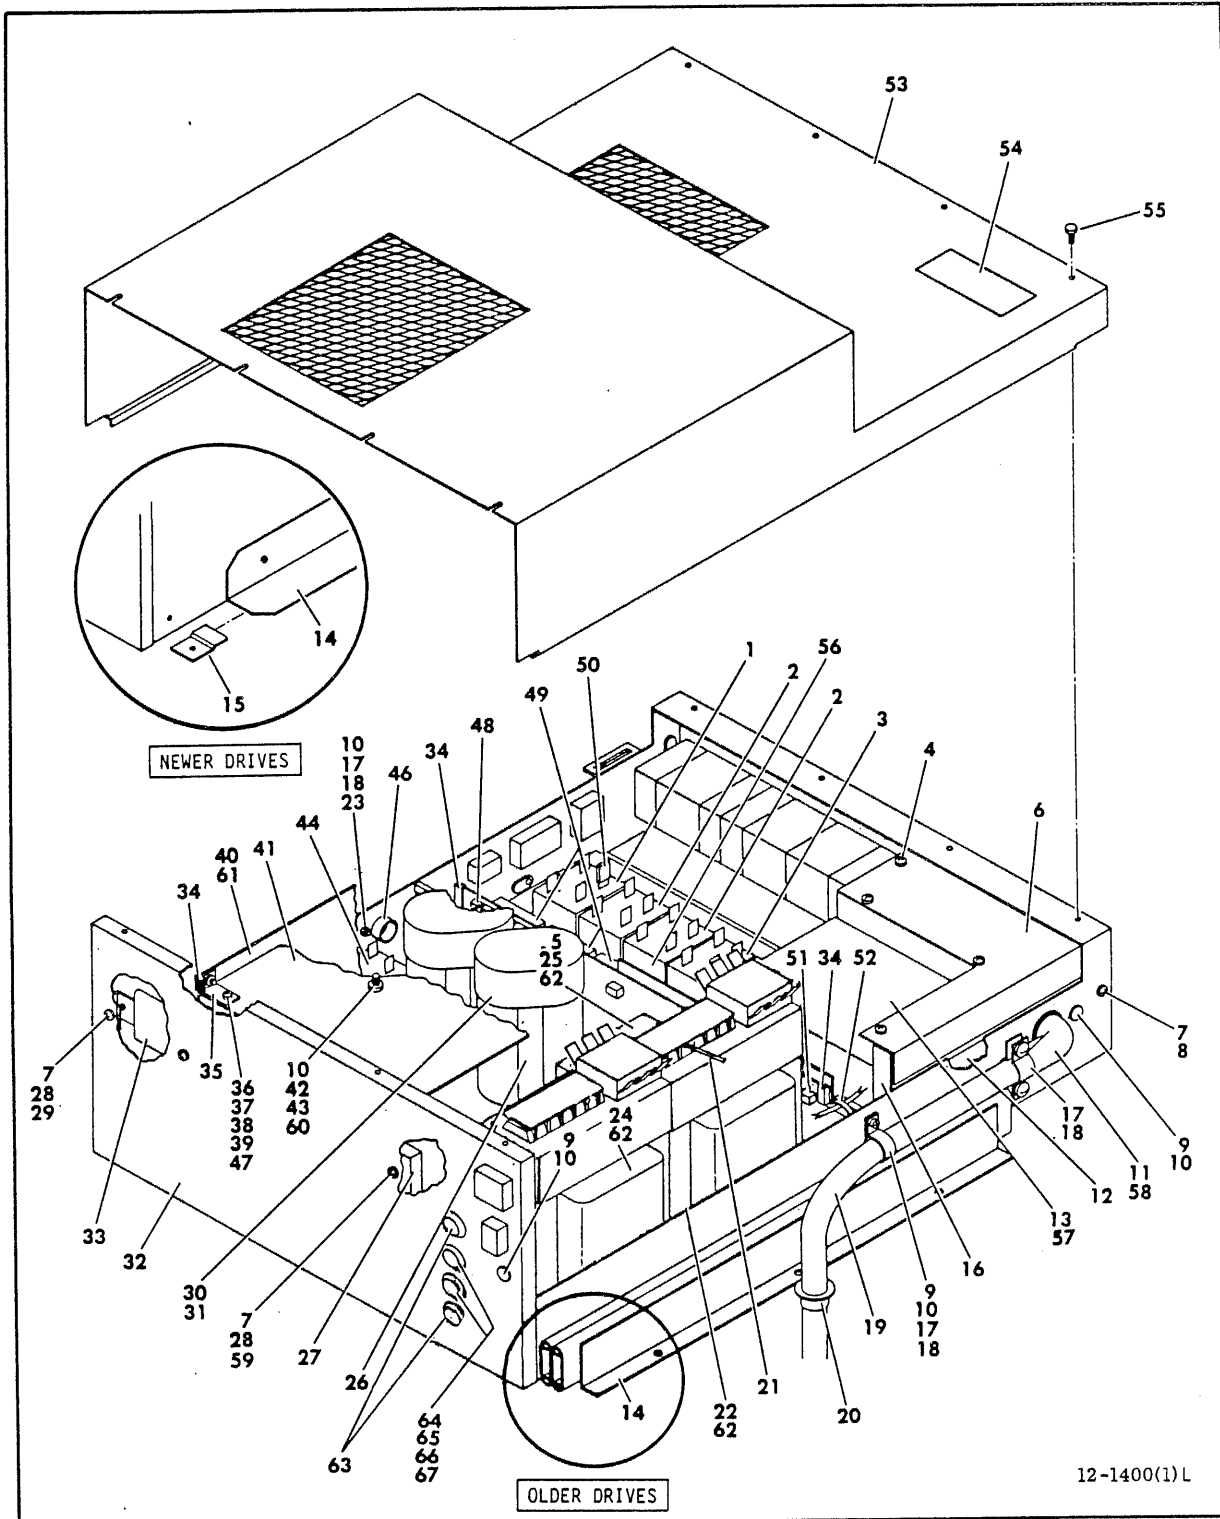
A-14. Power Supply Assembly Rear (Non-VDE)
